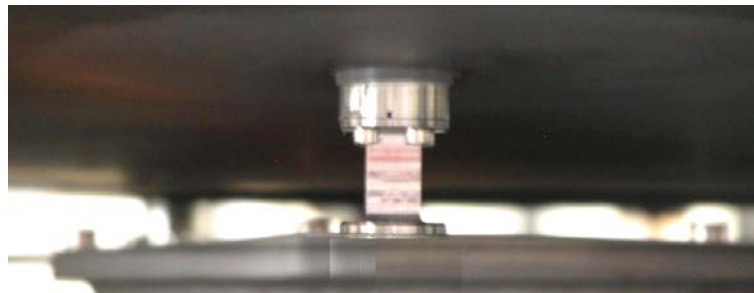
shows 1 of 3 M1 Rotational Restraint Flexure assemblies mechanically disconnected from M1 Rotational Restraint Flexure Plate by removal of M1 Rotational Restraint Anchor Puck
